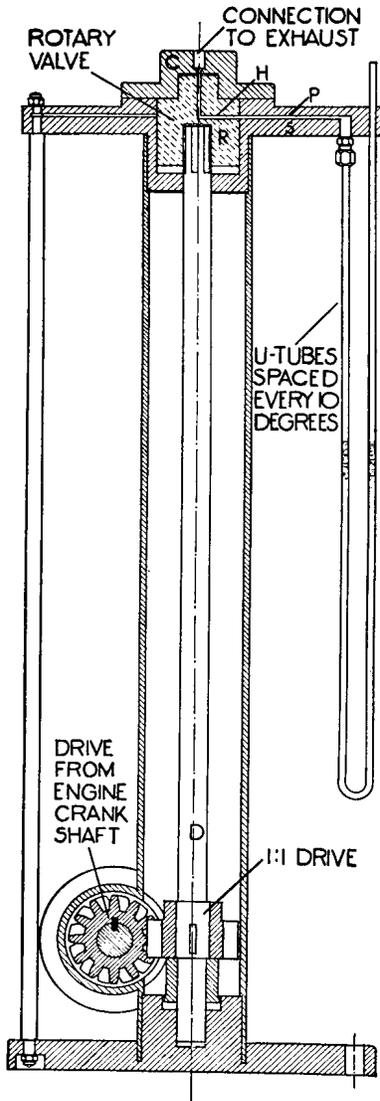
Schematic Drawing of Penn State Rotary-Valve Low-Pressure Indicator.
